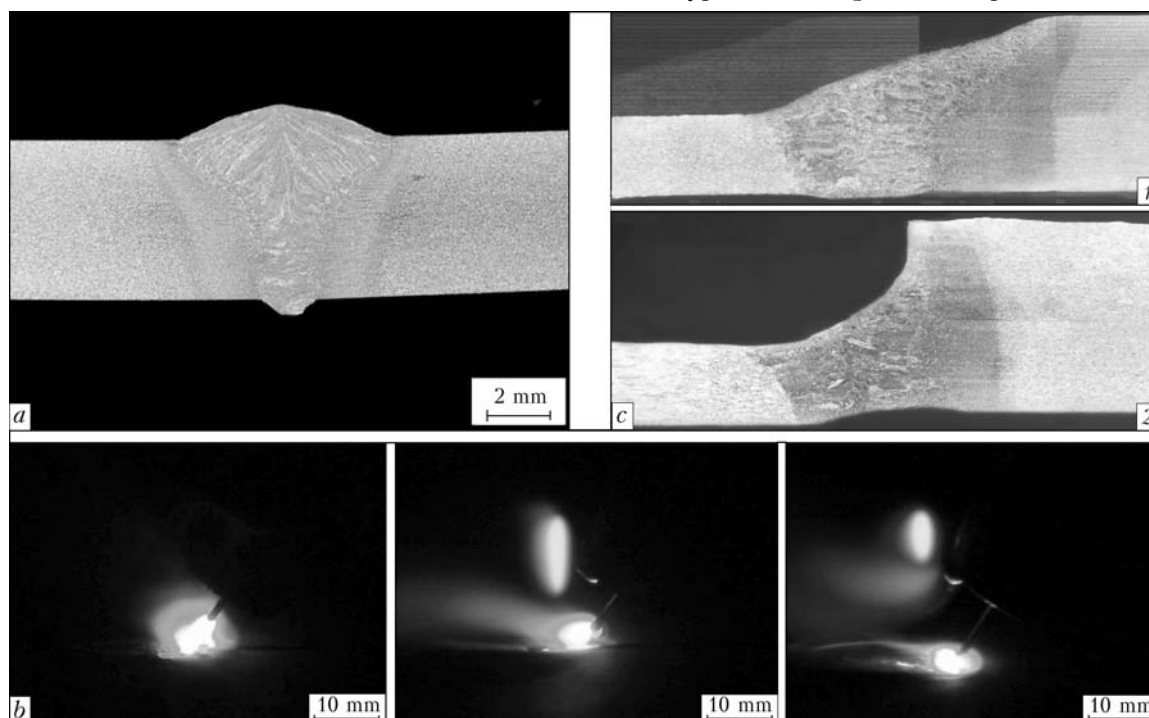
Hybrid CO₂ laser + MIG welding of steel S355J2, 5 mm thick, at gap of 1.2 mm, $P = 3800$ W, $V_d = 4$ m/min, in Ar + 50 % He (MIG), He (LW) (*a*); hybrid CO₂ laser + MIG/MAG welding with different shielding gases: 1 — stable hybrid welding process, 2 — partial blocking of laser beam by detached plasma cloud, 3 — complete blocking of laser beam by detached plasma cloud (*b*); hybrid CO₂ laser + TIG welding (*c*) of electrogalvanised steel, 0.7 + 1.5 mm thick, LW $P = 2200$ W, TIG — 150 A/15 V, in argon (1) and LW $P = 2200$ W, in helium (2)
